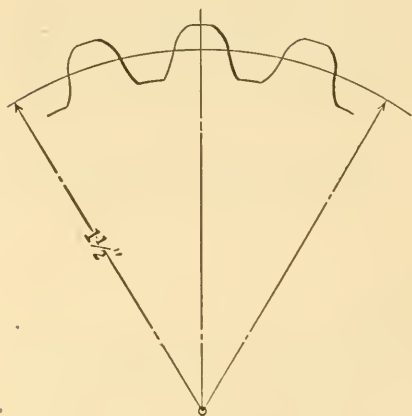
TOOTH OUTLINE AS PHOTOGRAPHED FROM LARGE SCALE DRAWING.
